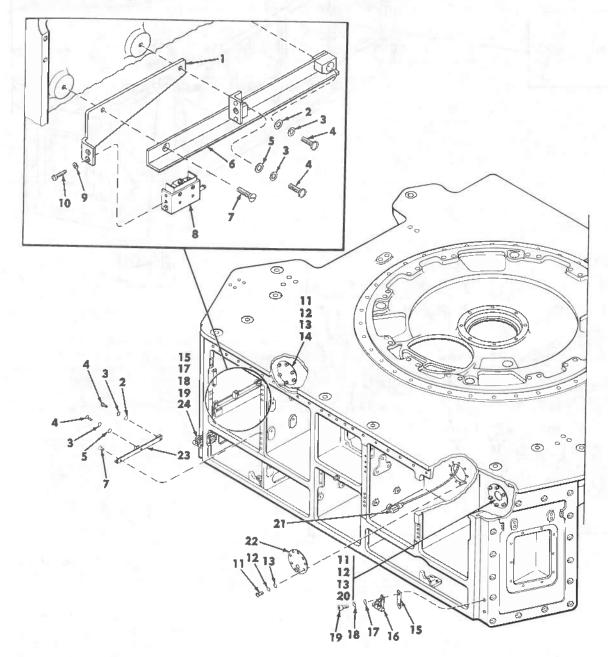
EQUIPMENT ENCLOSURE, AZIMUTH ORIVE /9136465/-PARTIAL EXPLODED WIEW
